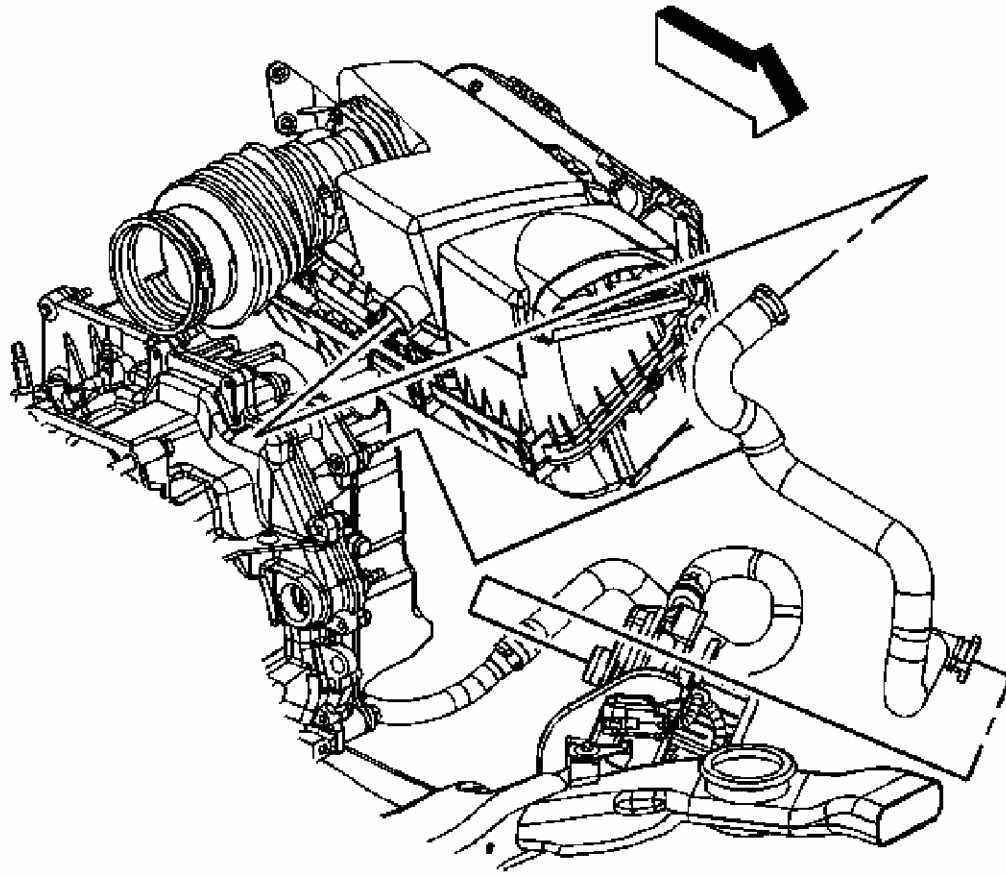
Identifying Secondary AIR Pump Inlet Tube/Hose
